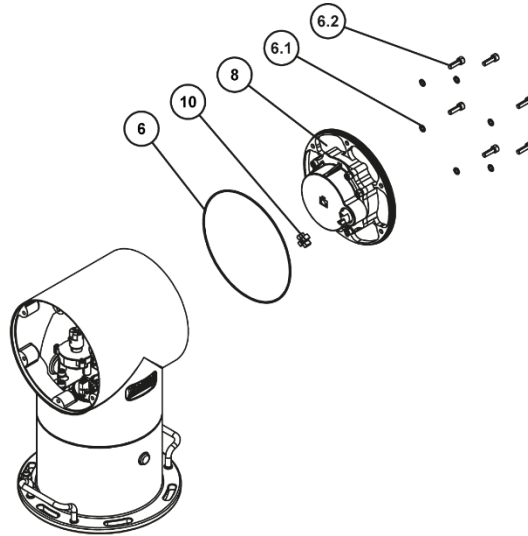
Exploded view of Pan/Tilt unit with Passive flange tilt and Clutch shore
